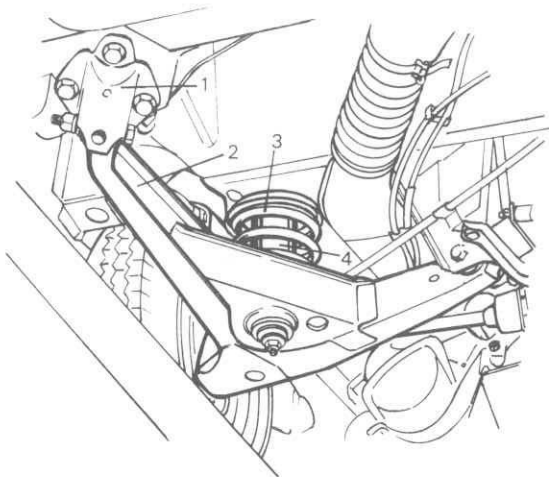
3 Underneath view of suspension showing front support 1, control arm 2, spring 3 and damper 4
